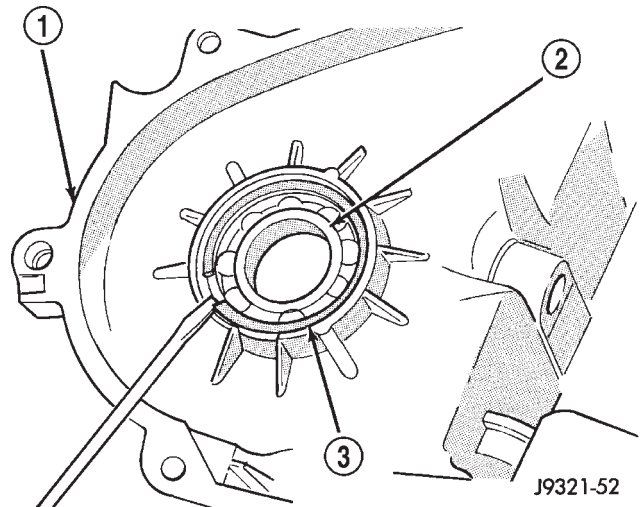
Output Shaft Front Bearing Snap-Ring Removal
